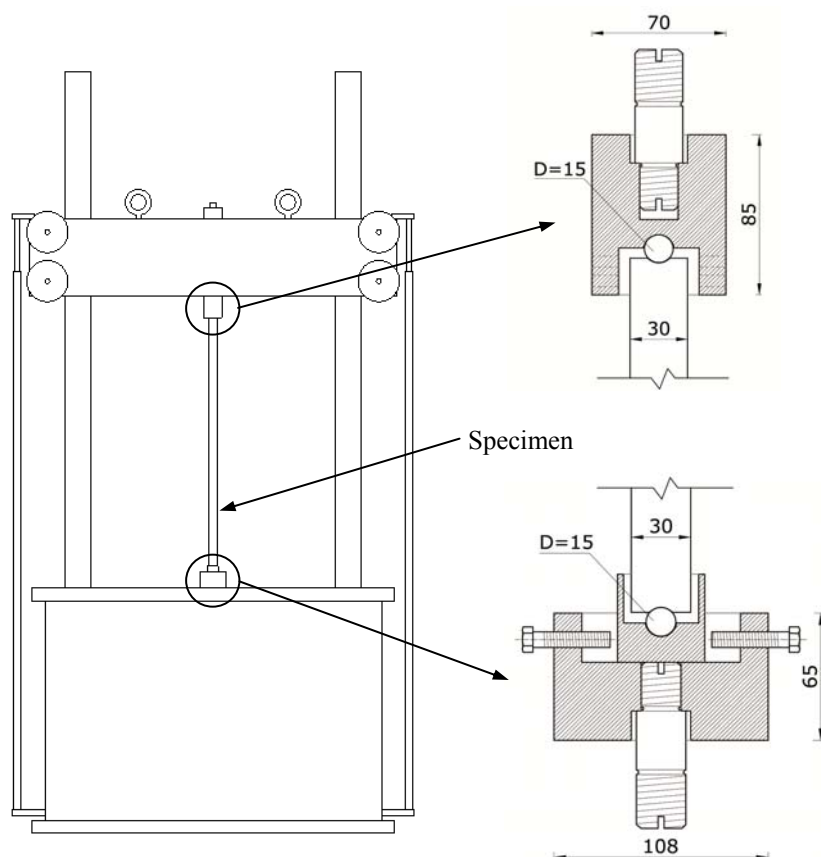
Schematic representation of the upper and lower end joints with indication of the main dimensions in mm.
